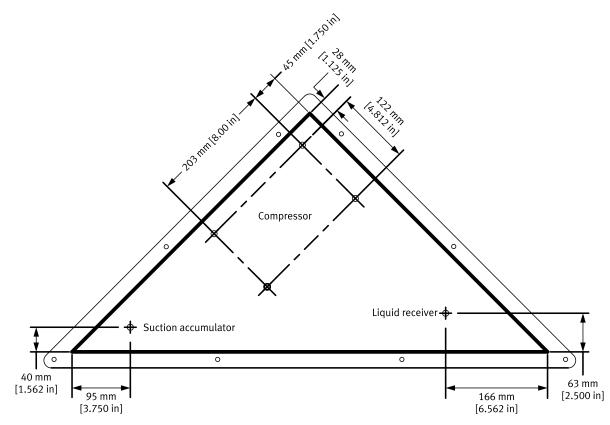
Diagram showing where to drill mounting holes for the compressor, suction accumulator, and liquid receiver.
